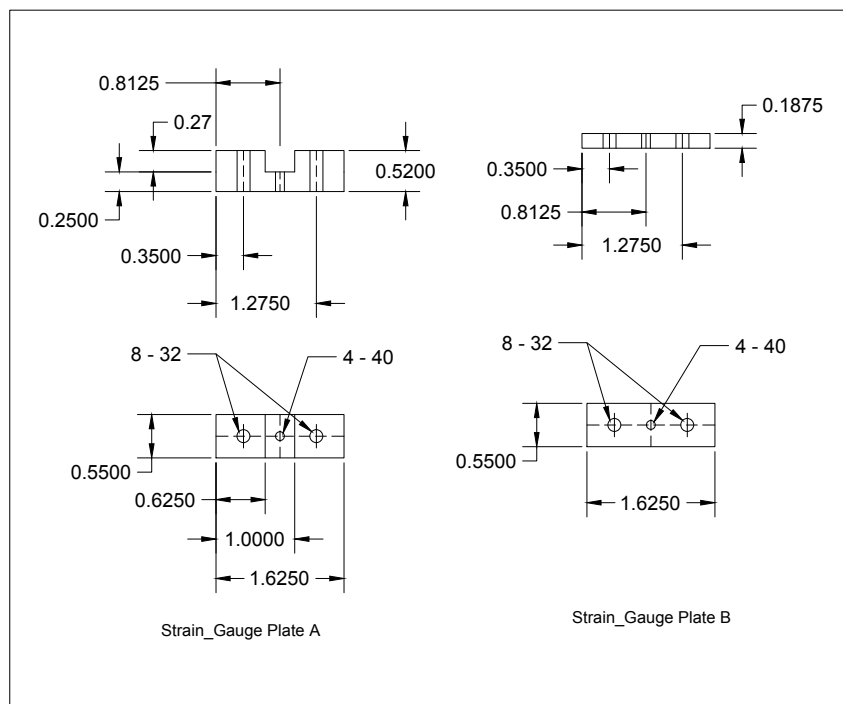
Upper and lower beam load cell aluminum connectors which attach to structure end plates while providing correct load cell bending
